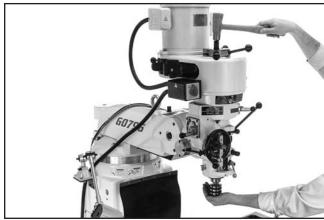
Tapping drawbar to unseat tool taper (G0796 shown).
